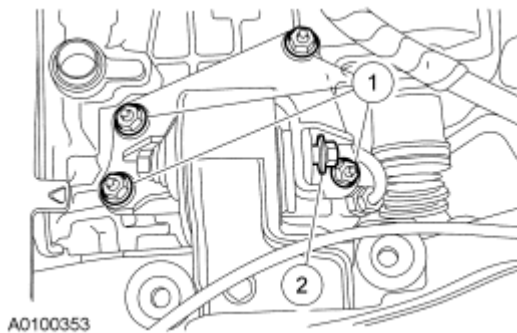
Locating LH Upper Transaxle Mount Assembly Bolt
